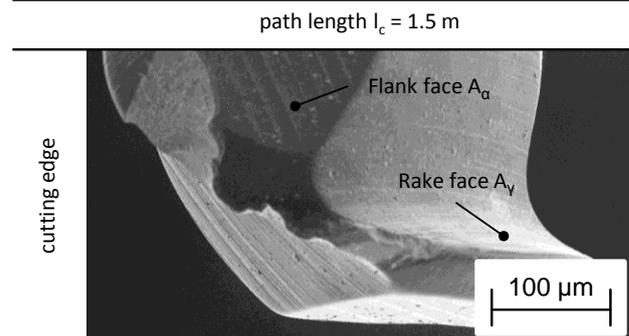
CrN-AlCrN-AlCrON-coated micro-ball end mill after machining zirconium oxide for a path length  $l_c = 1.5 \text{ m}$
